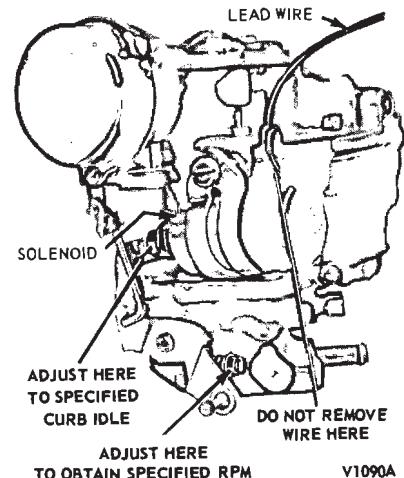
Carter Model YF 1-V With Solenoid Throttle Positioner
